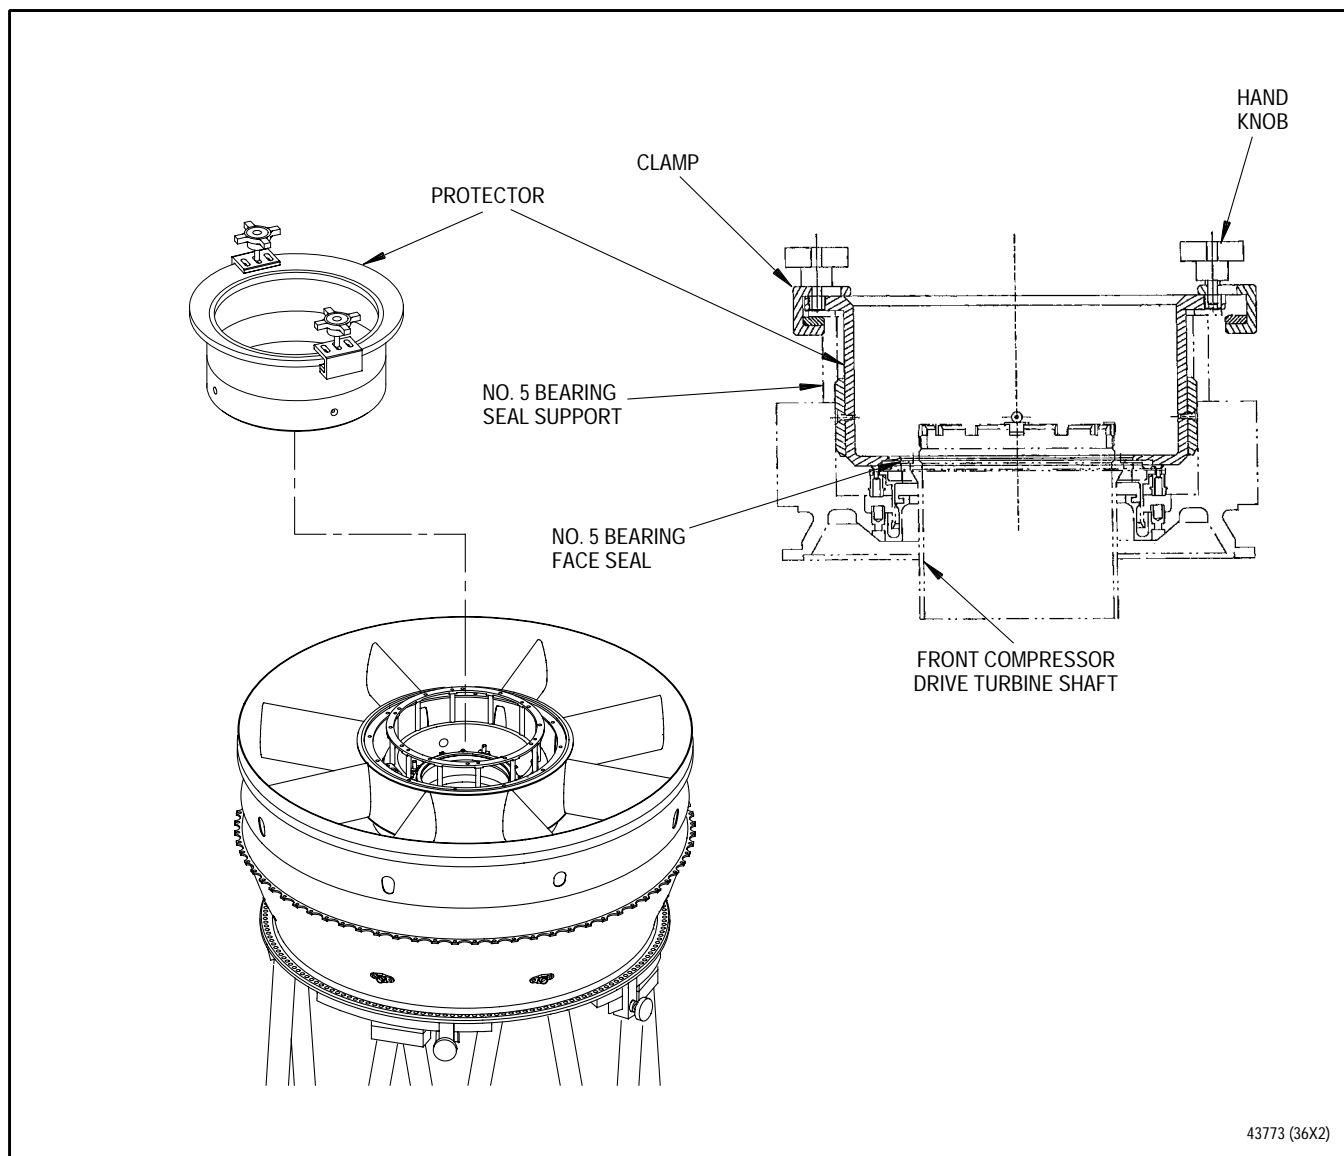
No. 5 Bearing Outer Race and Outer Race Retaining Nut - Installation (Sheet 3 of 4)
